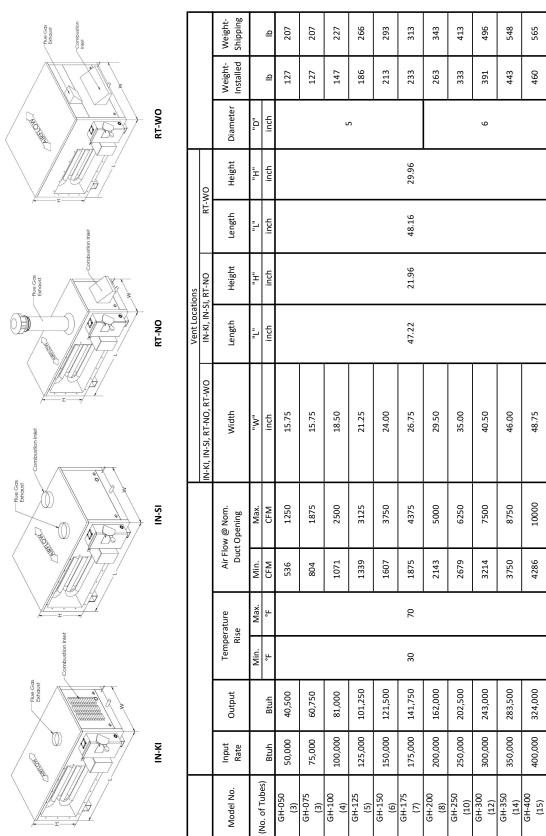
DIMENSIONED DRAWINGS OF DUCT FURNACES
